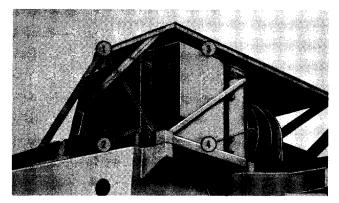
BODY HOIST UNIT 1. Motors 2. Cover 3. Gear Unit 4. Wire Rope Drum
